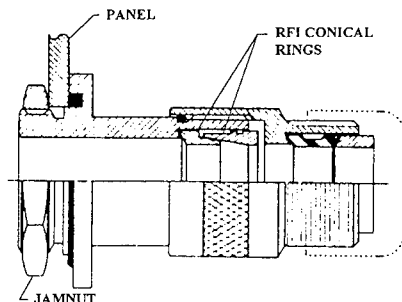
Thru Bulkhead Fitting for Overall Shielded Copper Cables (Drawing Courtesy of Glenair, Inc.)
